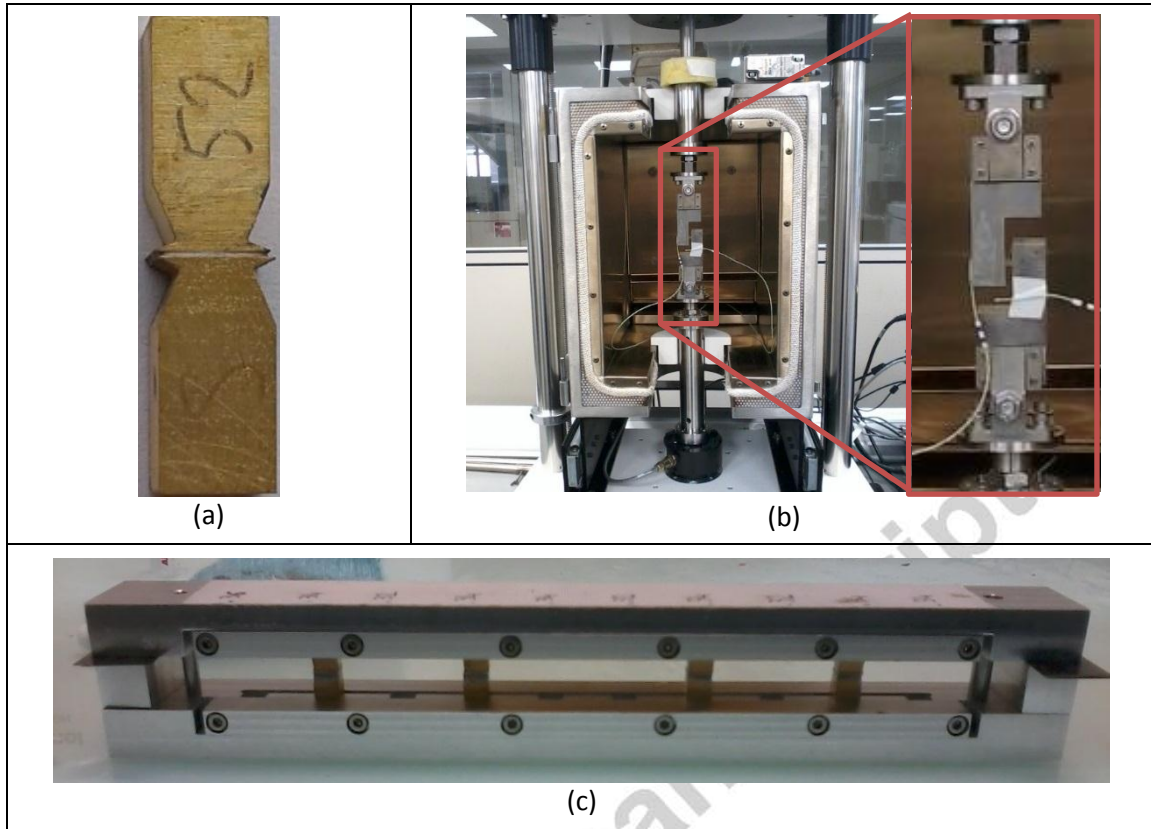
bonded sample (a) ; test setup mounted in the tensile machine (b) ; special tooling used to bond up to 10 samples simultaneously (c)
